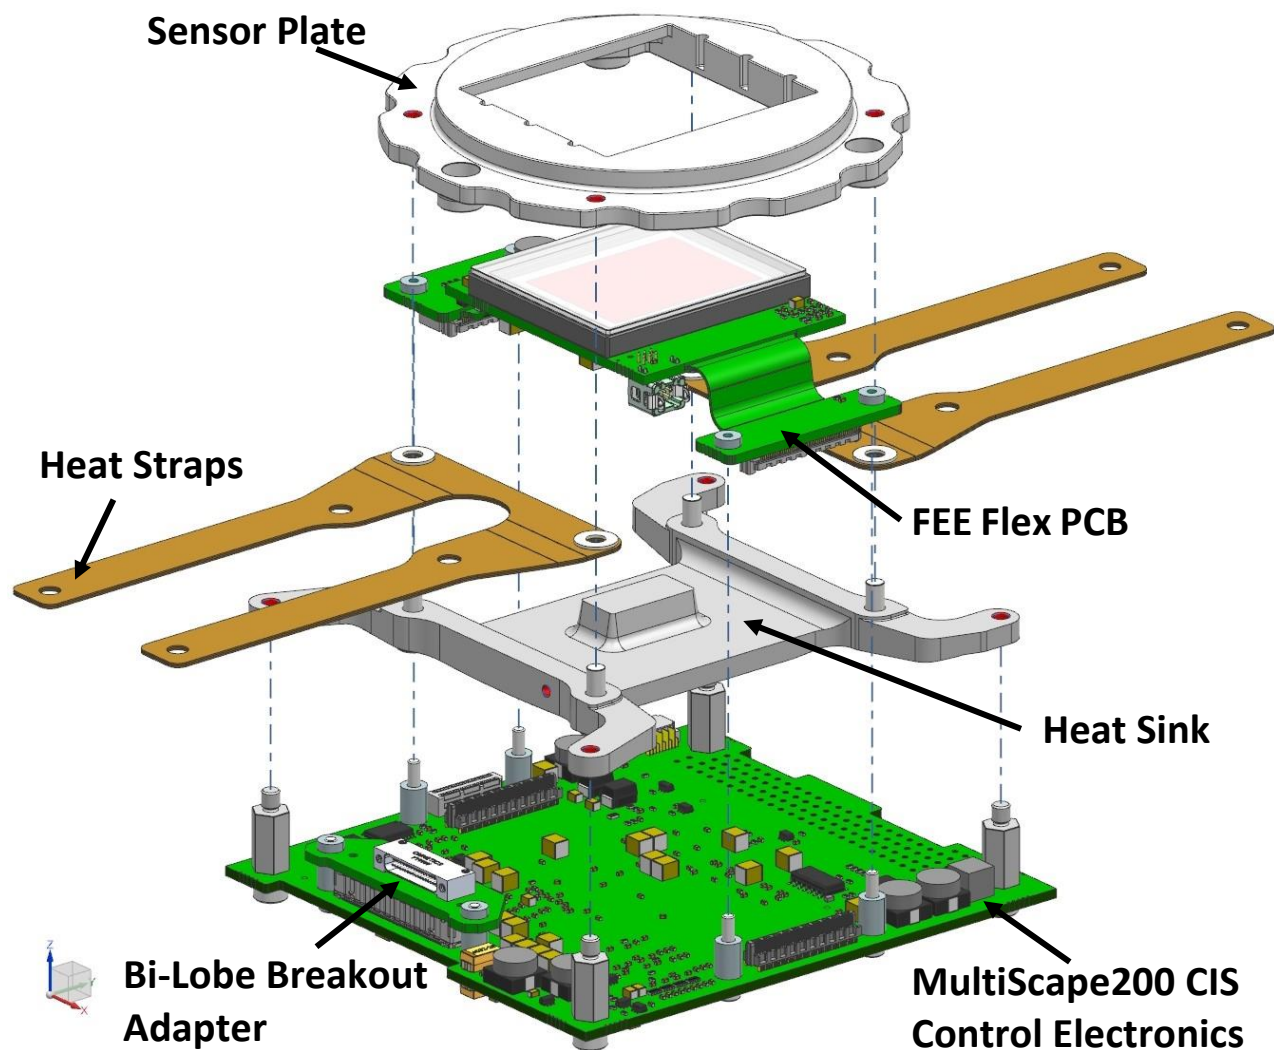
Exploded View of MultiScape200 CIS Sensor Unit and Control Electronics
